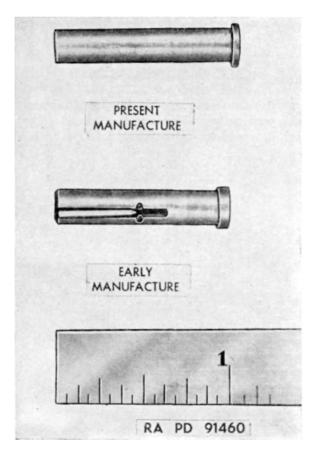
Trigger pins carbines, cal. .30, Ml and MIA1 — early and present manufacture.
